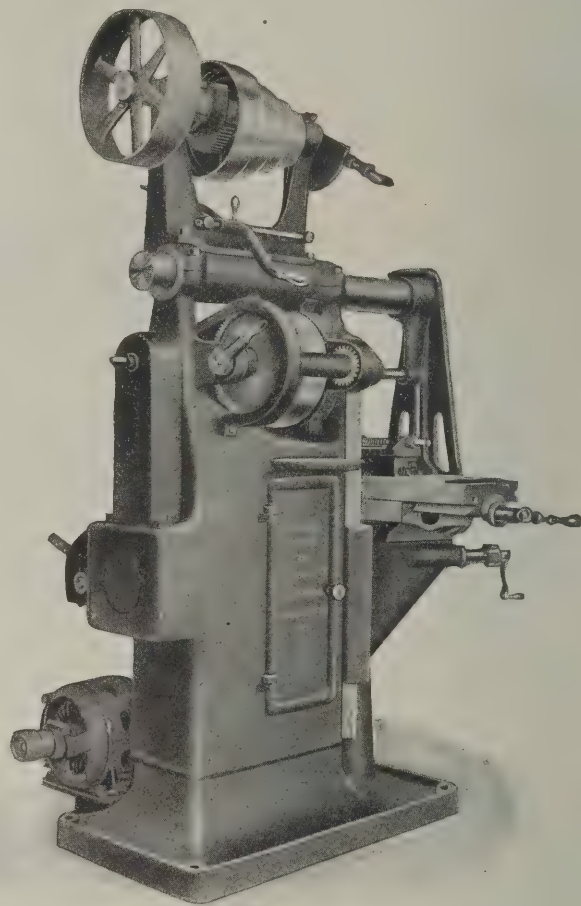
Oesterlein Constant-speed Motor-driven Machine
